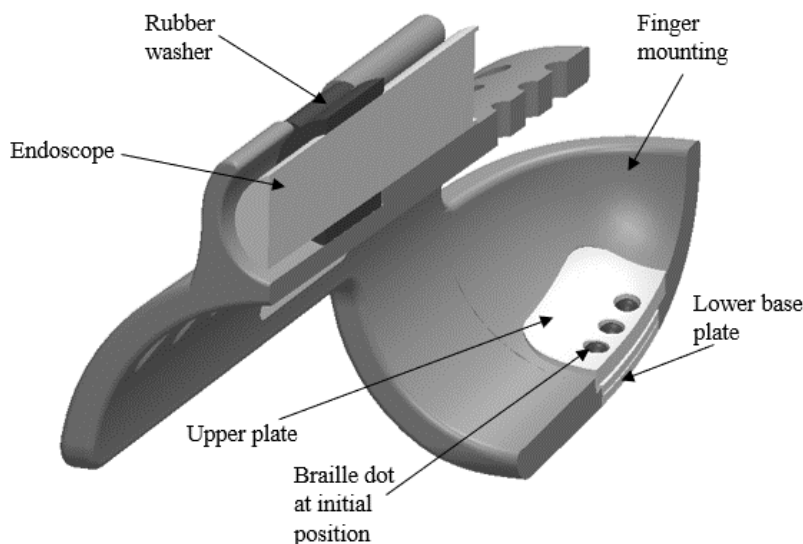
Sectional view illustrating position of inflated DEA on finger mounting
